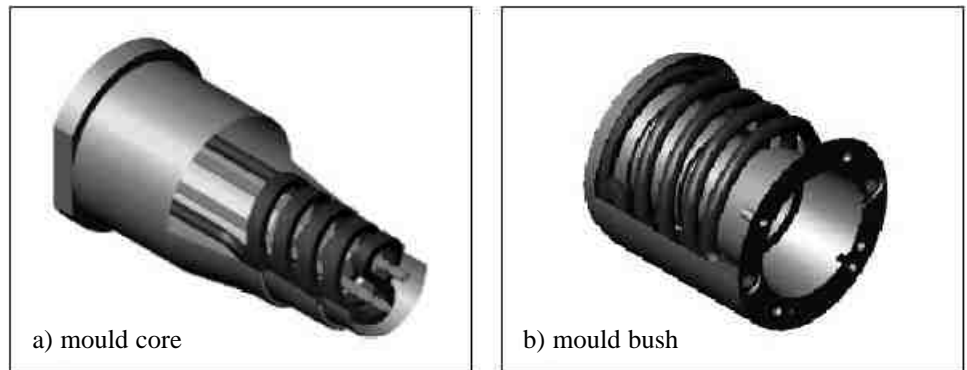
CAD model showing the arrangement of cooling channels in a mould.
